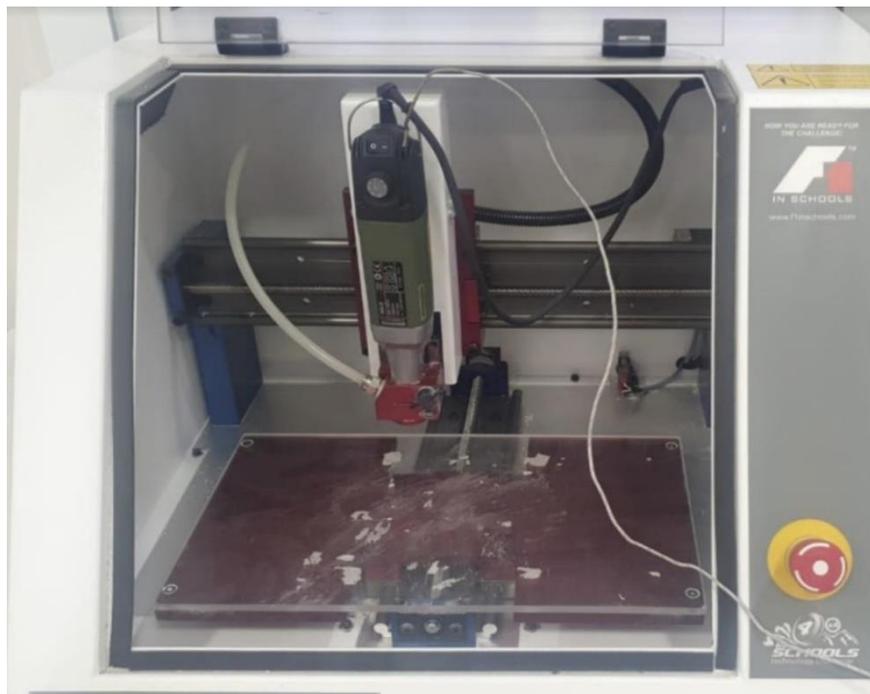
The adjusting work piece and drill bit at the drilling machine.
